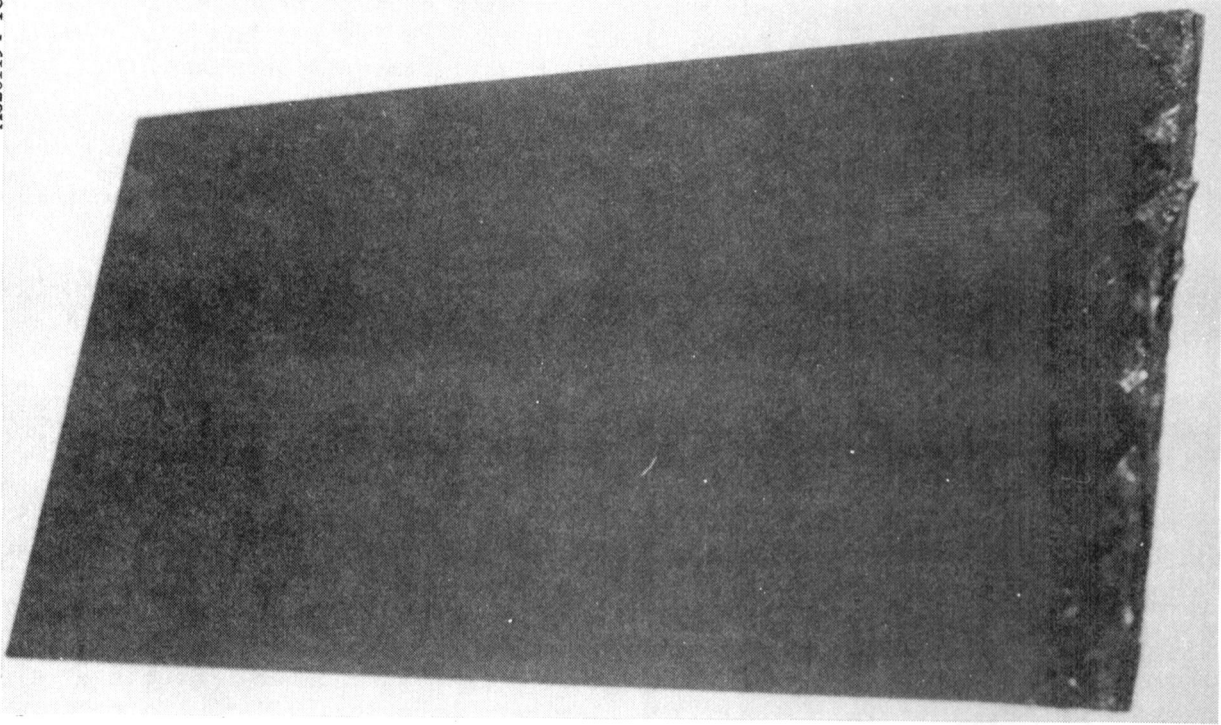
Typical End Failure of Undamaged Control Specimen Without Potted Ends
